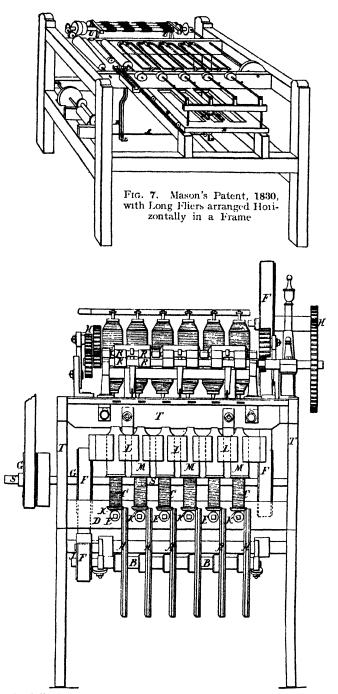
McCulley's Patent, 1844, in which any Spindle could be taken out of Contact with the Driving Wheel.
